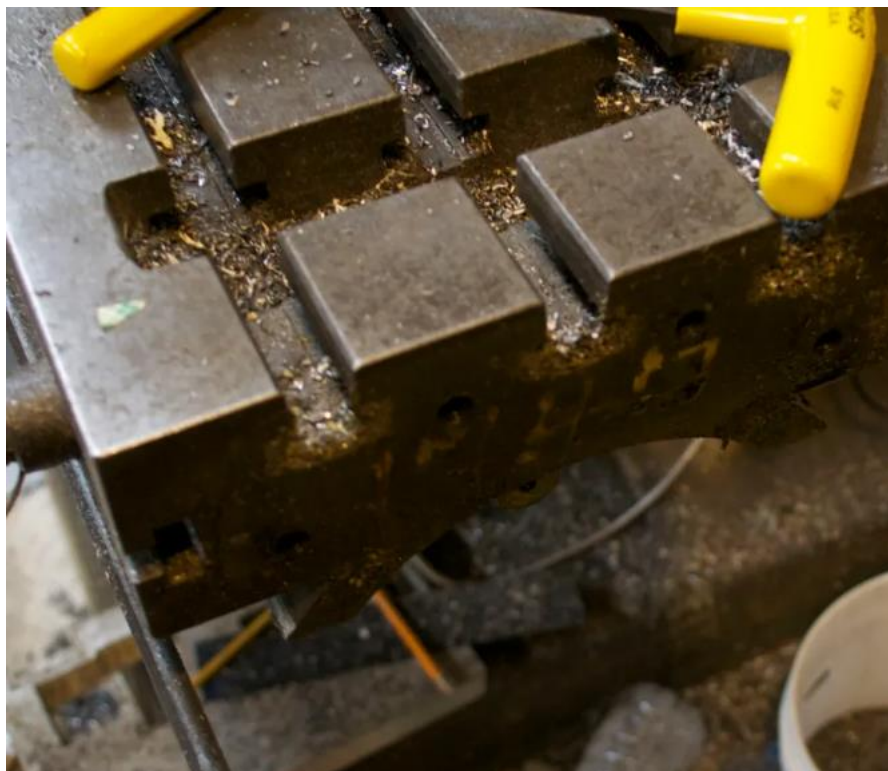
Lead screw removed with working area showing burr, debris and disorganised tools.
